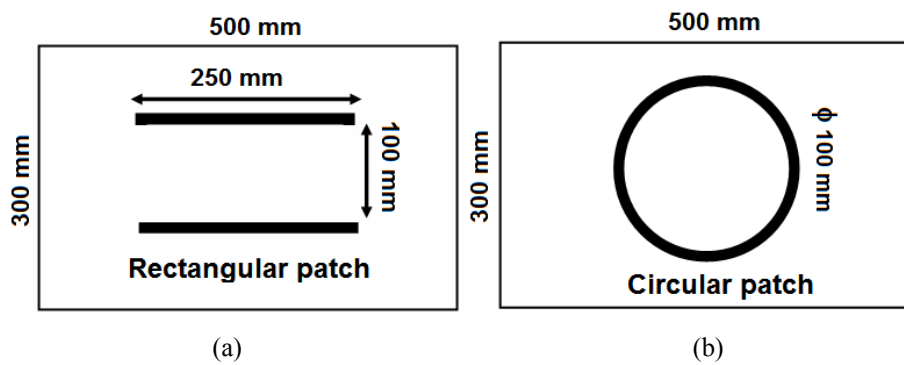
The dimensions of the samples and joints (a) rectangular path (b) circular path
